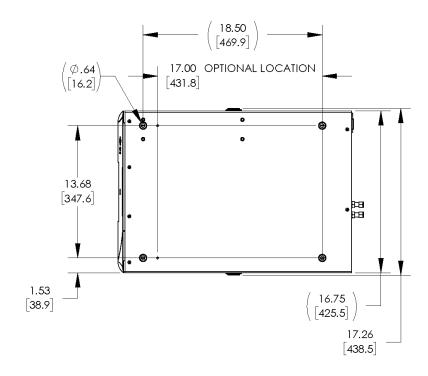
Bench Mount Assembly (dimensions in inches [mm])
